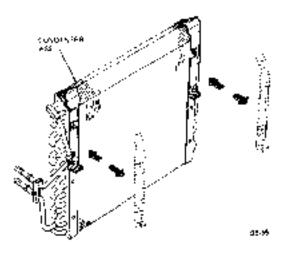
B-74 Condenser Assembly and Attachments. Opel 1900 - Manta
